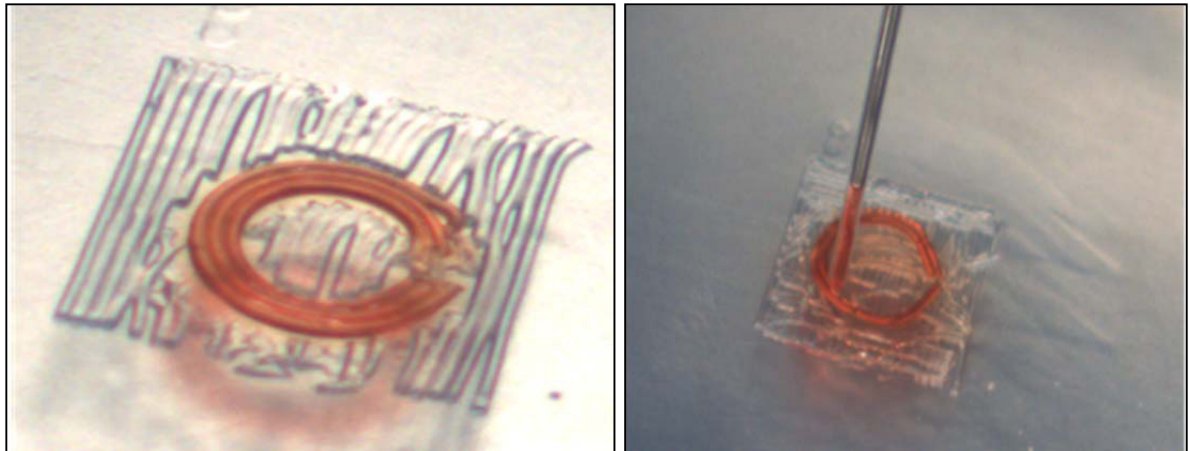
3D Printing of support layers with zig-zag pattern.
